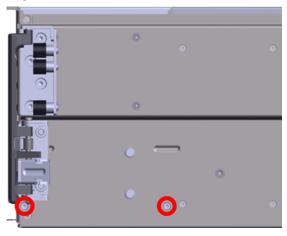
Right Drive Cage T8 Screw Location (Outside of the Chassis)
